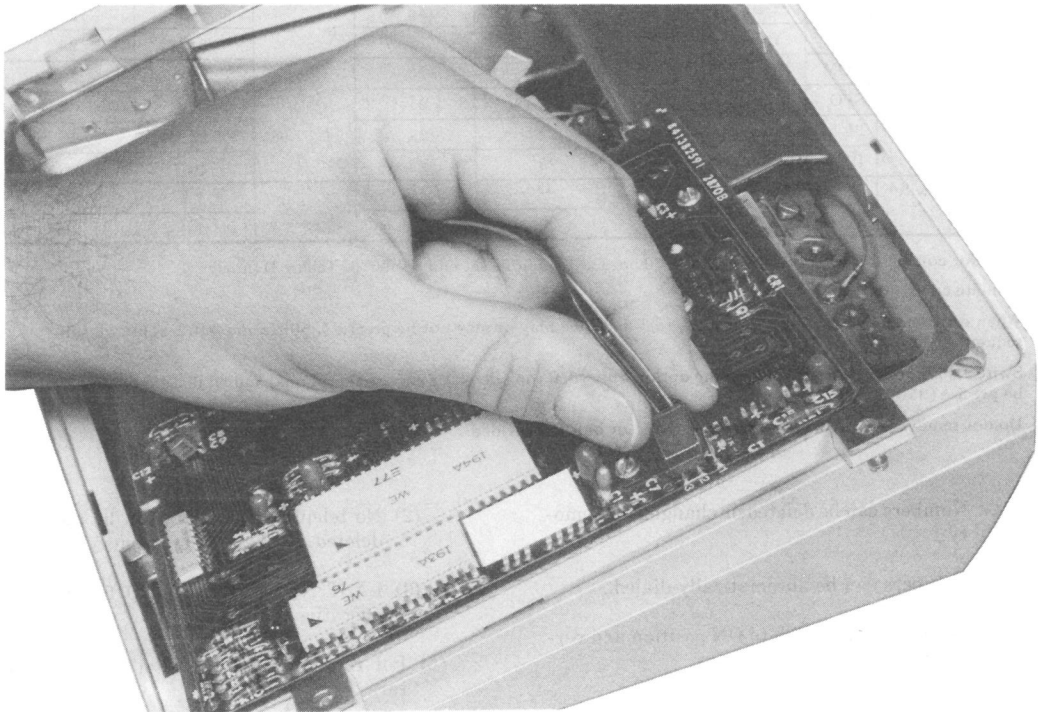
2870A1 Dial, Connection of D-180818 Kit of Parts, Record Disable Feature Only
